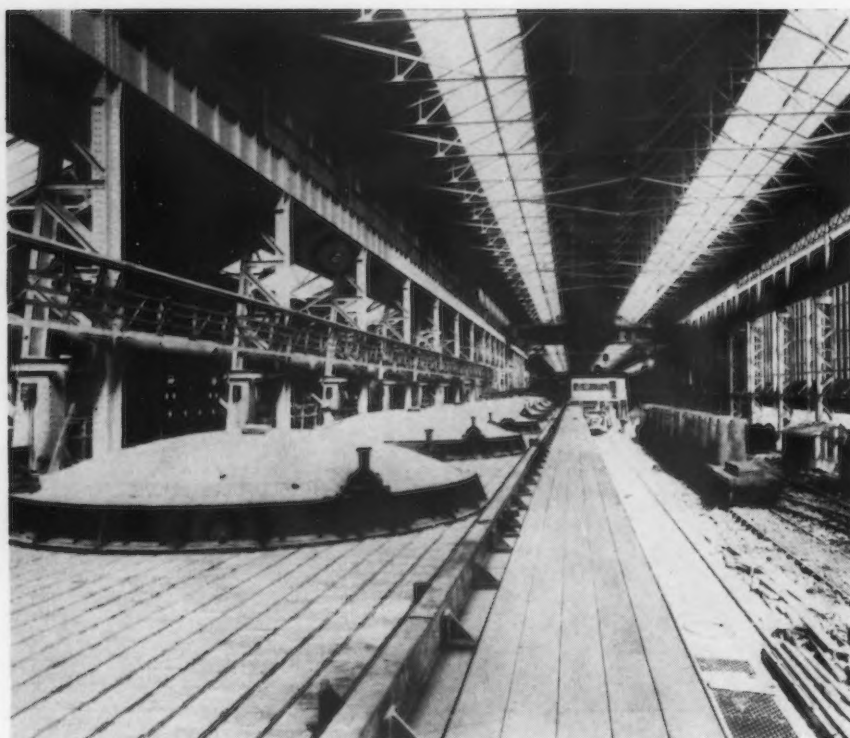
Circular type soaking pit. (Courtesy of Salem Engineering Co., Ltd.)
